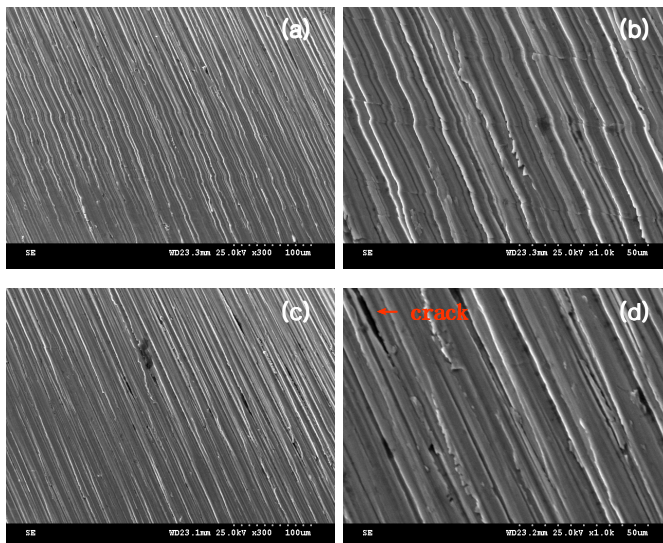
SEM showing crack initiation around fractured surface of Ni-Ti files fractured at the lower part after clinical use.
